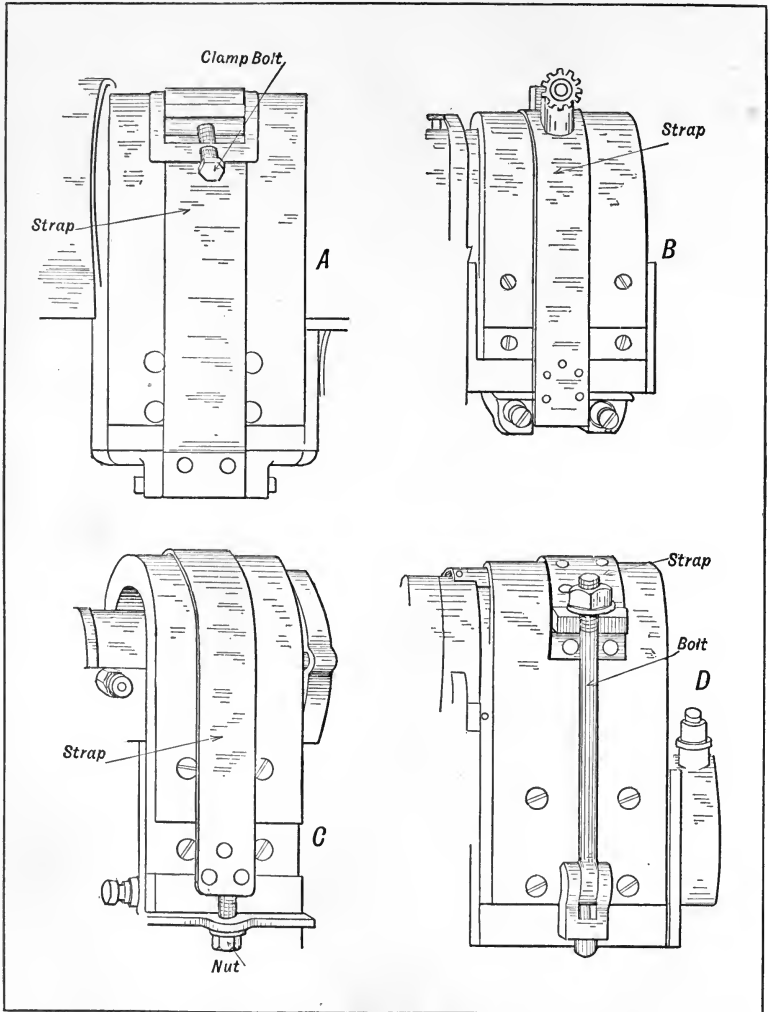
Simple Methods of Holding Magnetos in Place on Engine Base to Permit of Easy Removal of Apparatus when Desired.
